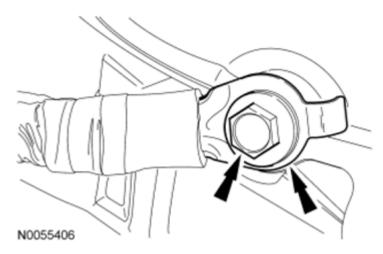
Locating Ground Cable Bolts Courtesy of FORD MOTOR CO.
